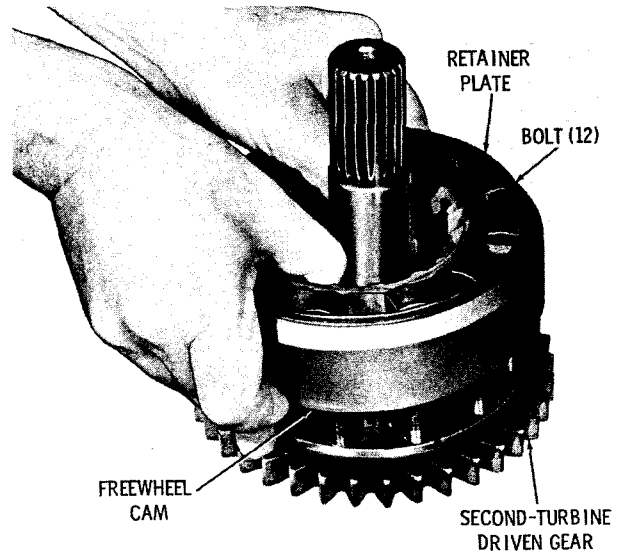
Installing assembled cam onto assembled second-turbine driven gear
